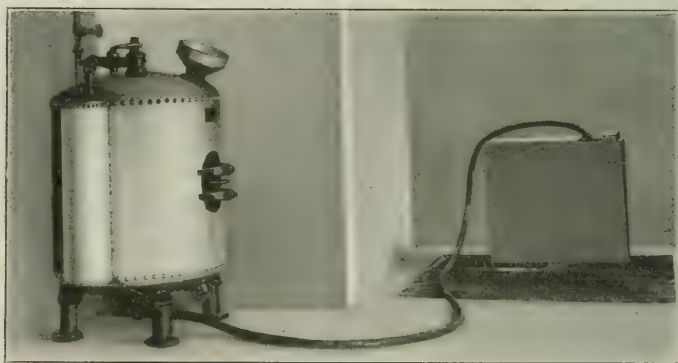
VIEW OF MACHINE AND APPARATUS IN BLASTING ROOM
